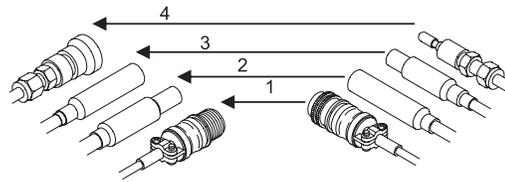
Connecting the Weld Head to the Extension Cable
